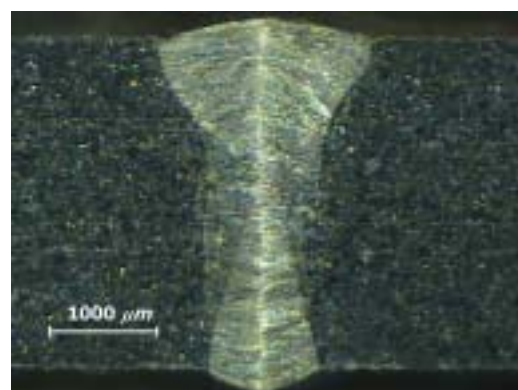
Cross-sectional area of bead on plate welding at P=1.6kW, v=1.0m/min and z=0.5mm
